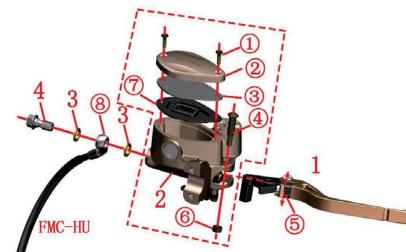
FRONT FORK COMPONENT		Add brake fluid, rocker adjustment	CHK	Q
